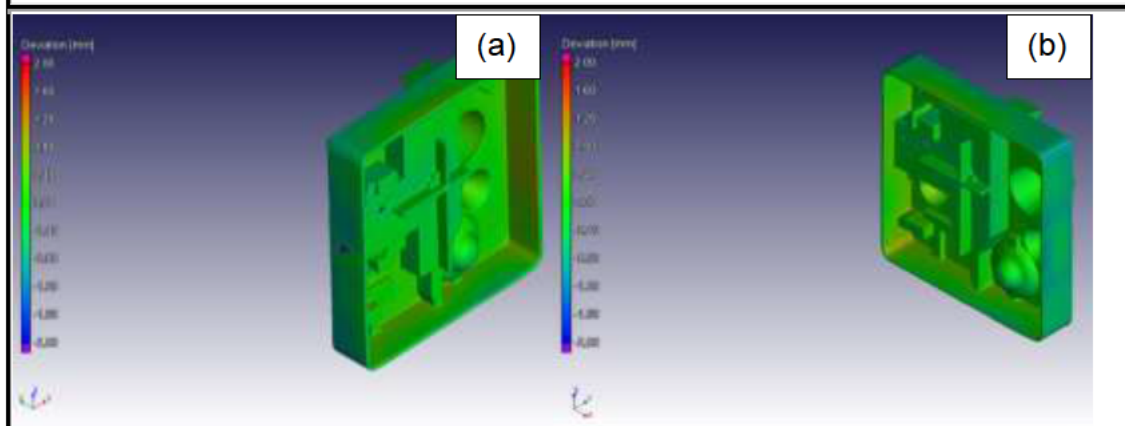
3D images: (a) top-left-front and (b) top-front-right
